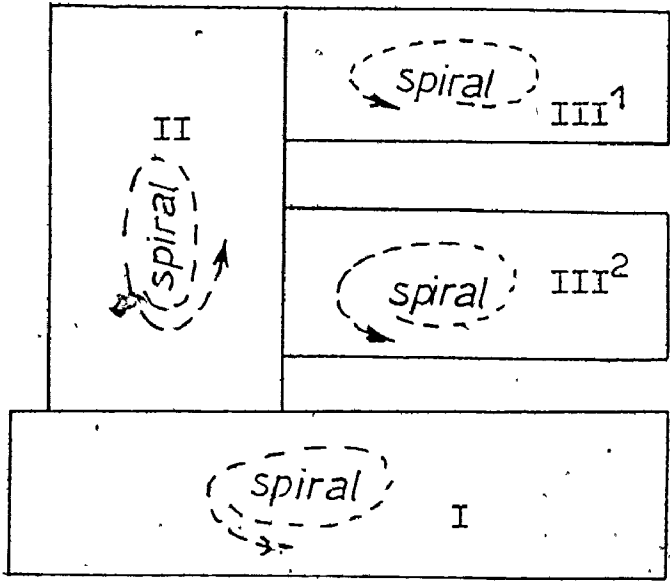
A. SPIRAL machining a "3 generation" part.
